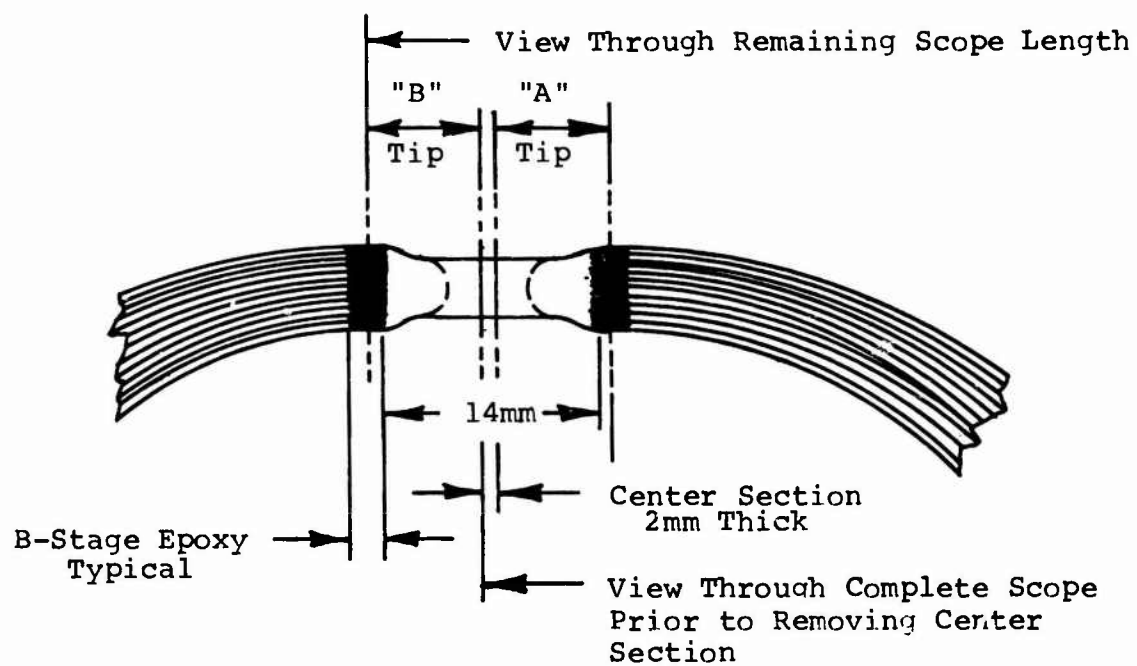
Dissecting Technique Showing Location of Cuts in Fused and Cemented Areas of Fiberscope
